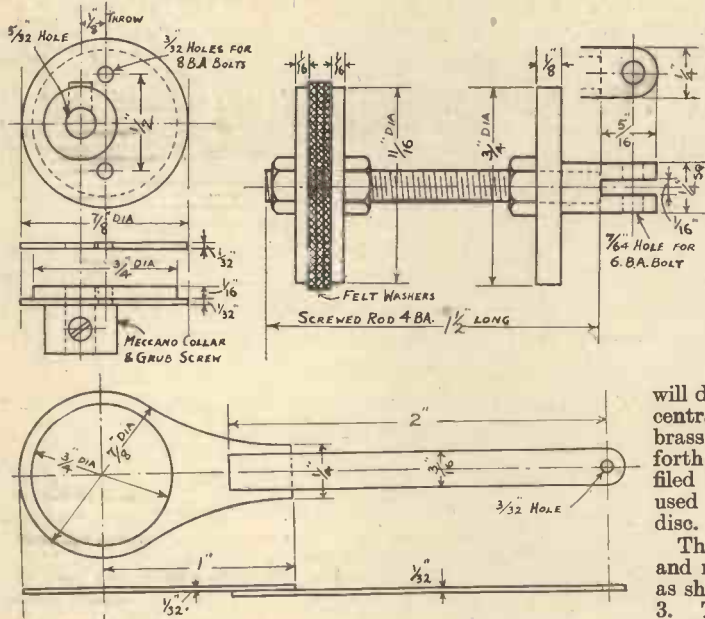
The eccentric strap and rod is in two pieces as shown. The photograph below shows this piece of mechanism completed.
